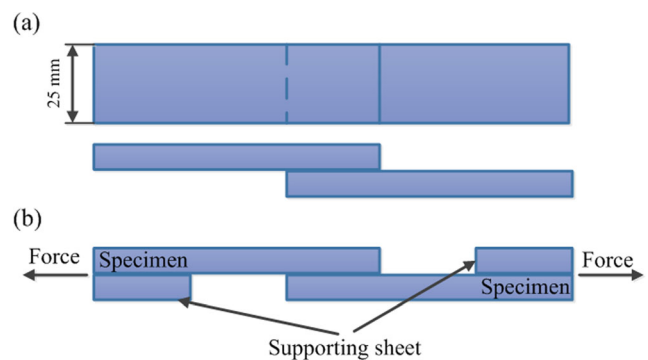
The schematic of tensile shear specimen. a The 25-mm-wide tensile shear specimen. b Two supporting sheets were applied in the tensile shear test
